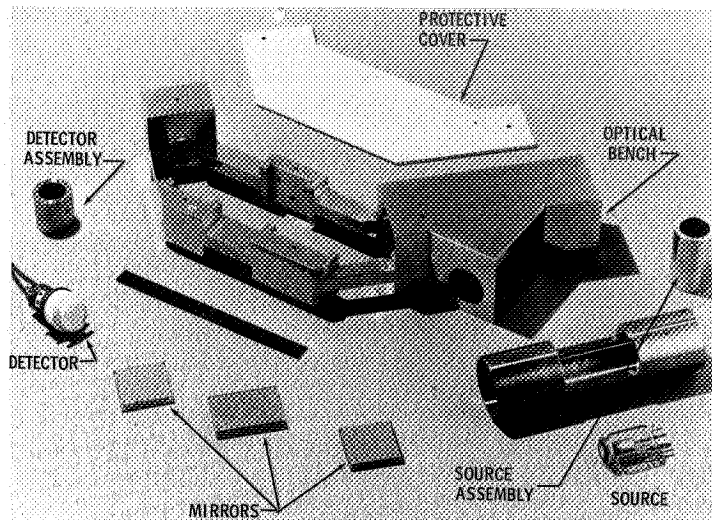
Multiple bounce reflectance measurement optical bench (exploded view with components)
